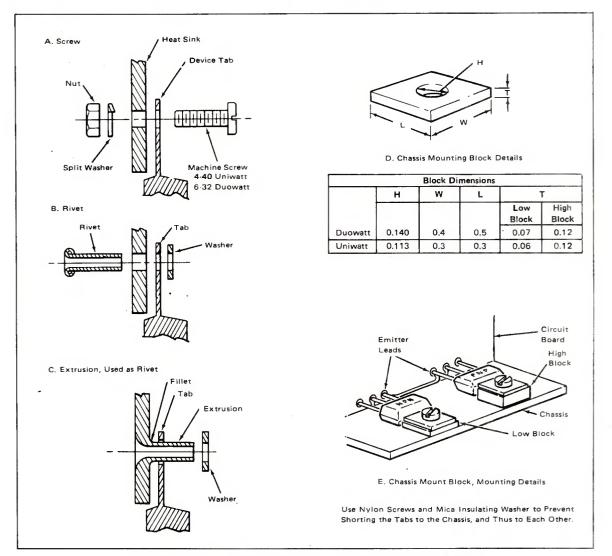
Methods of Mounting Duowatt and Uniwatt Transistors to a Heat Sink
